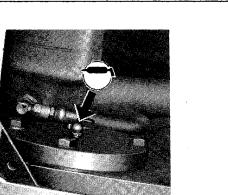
Upper Cluster Gear Shaft Bearing (1 Point)
